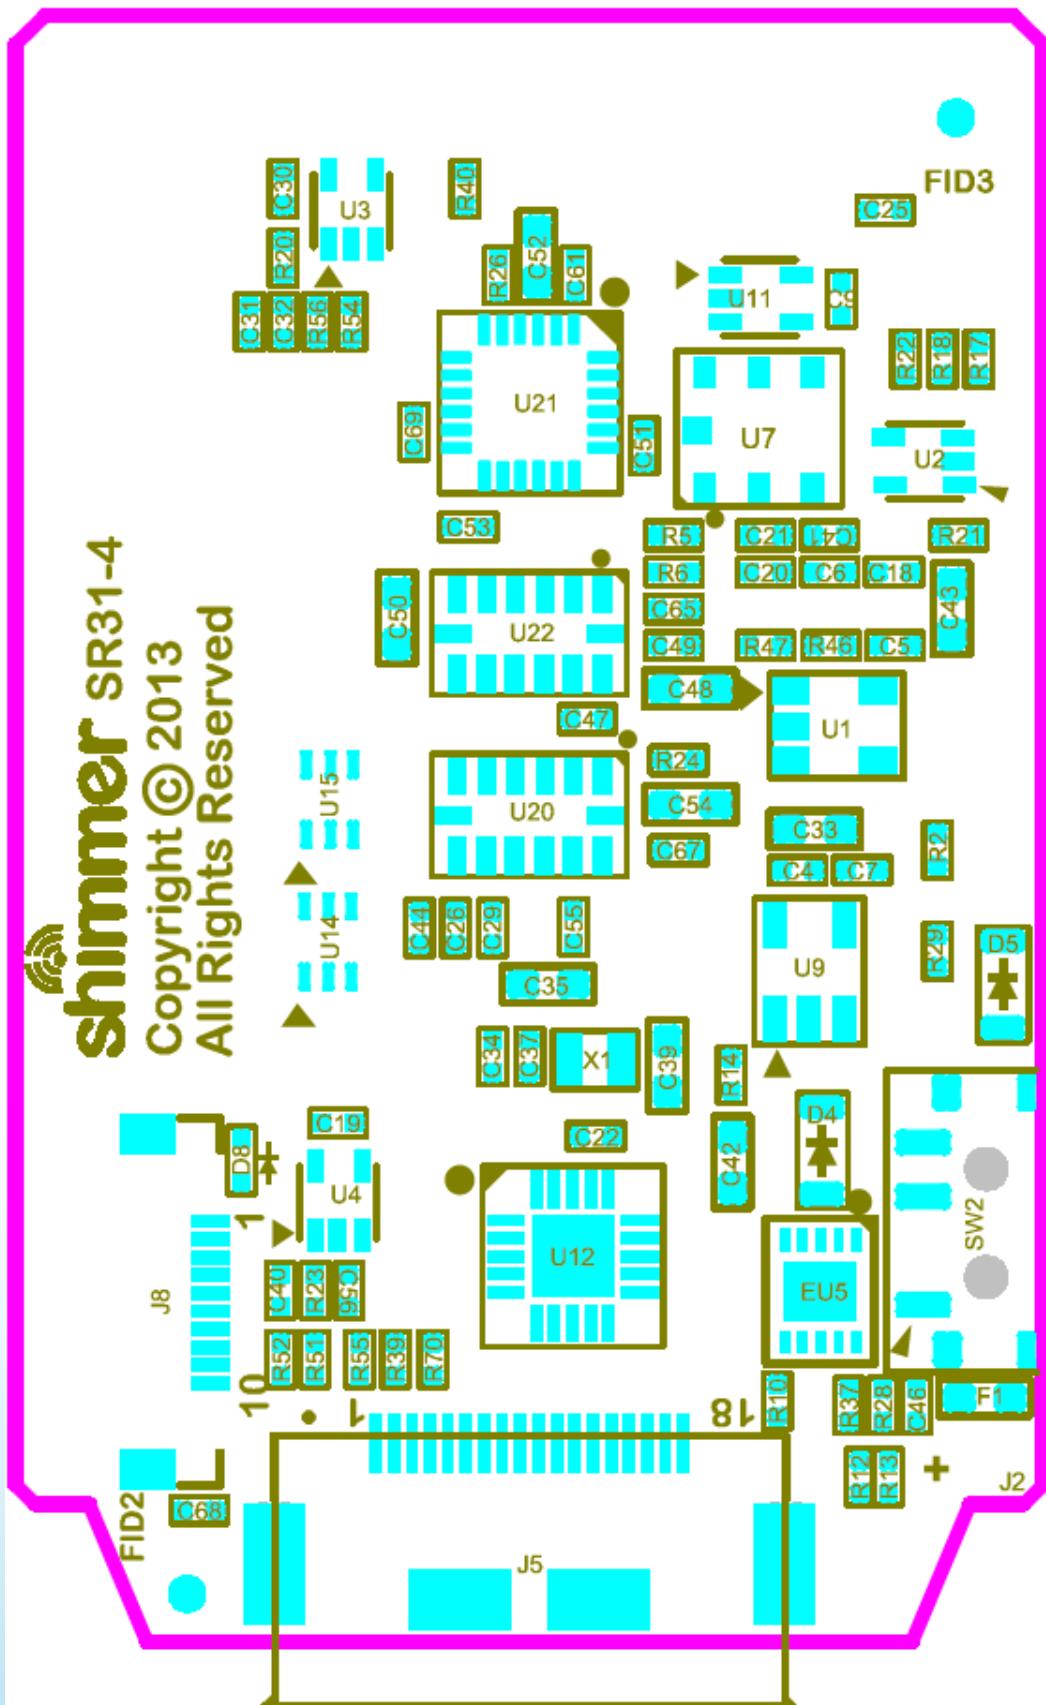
Shimmer3 mainboard Layout Bottom View
